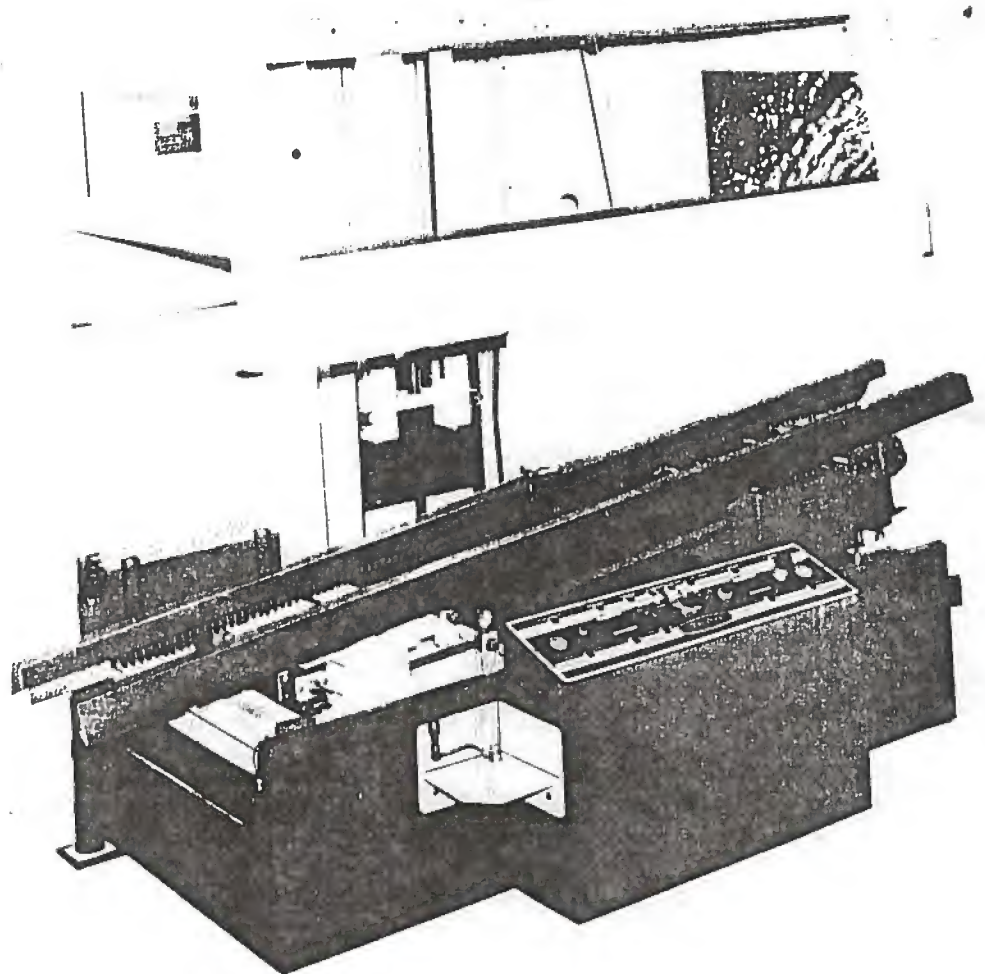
Bench-type wave-soldering machine. *Courtesy of the John Treiber Company.
